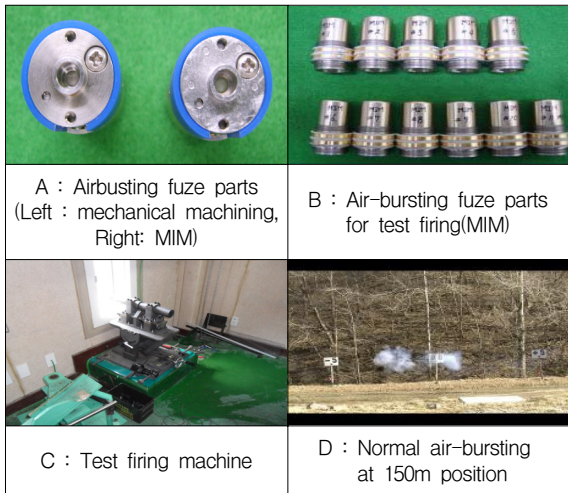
Photographs showing the field test firing of the 25mm air-bursting shell equipped with MIMed fuze parts
